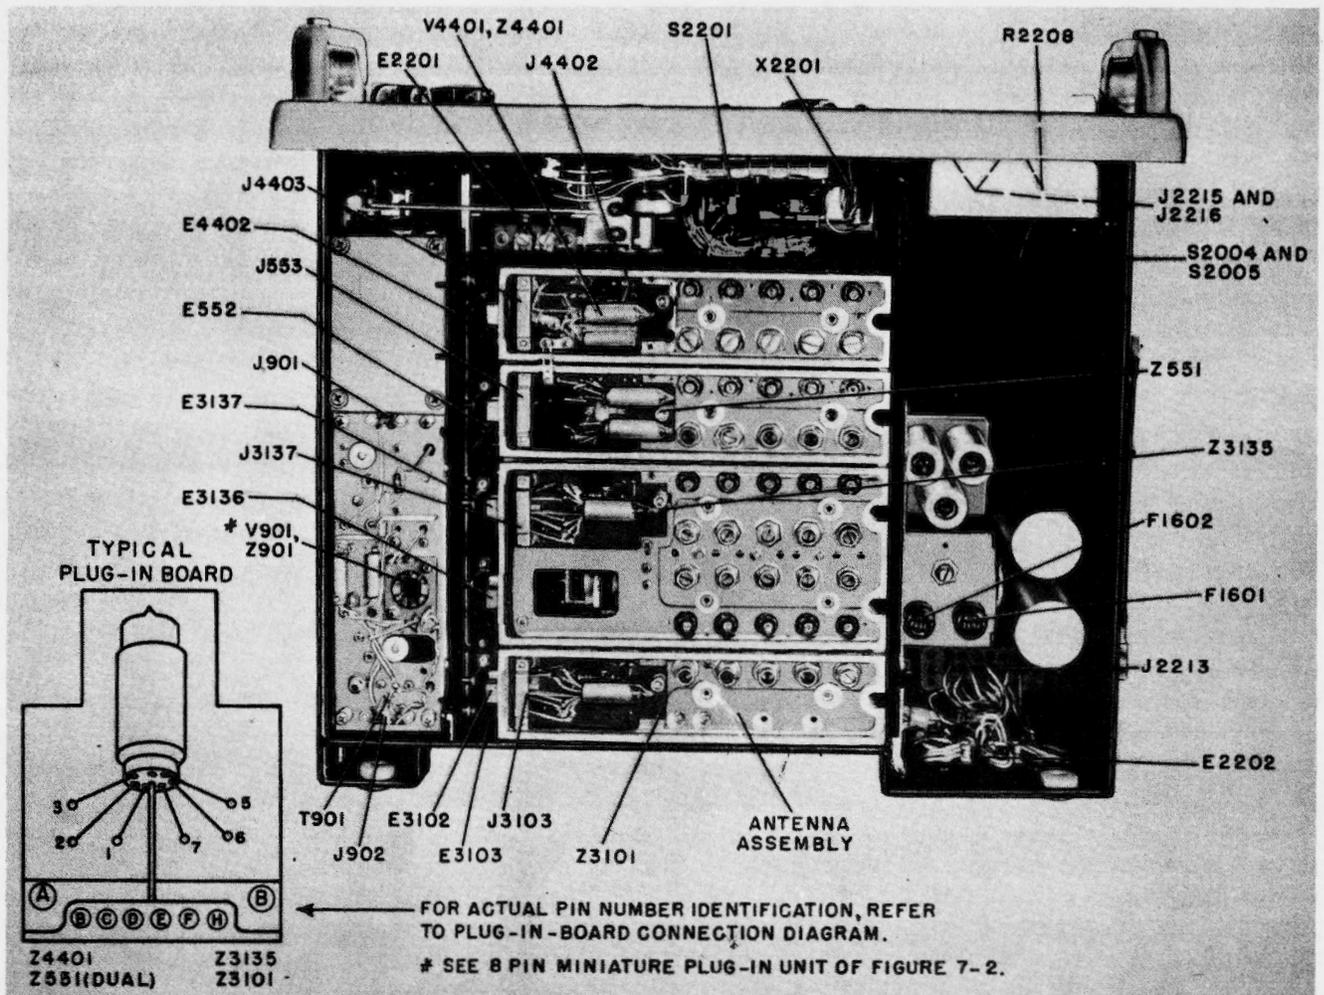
Receiver Stage Gain and Trouble Shooting Measurement Points, Bottom View
